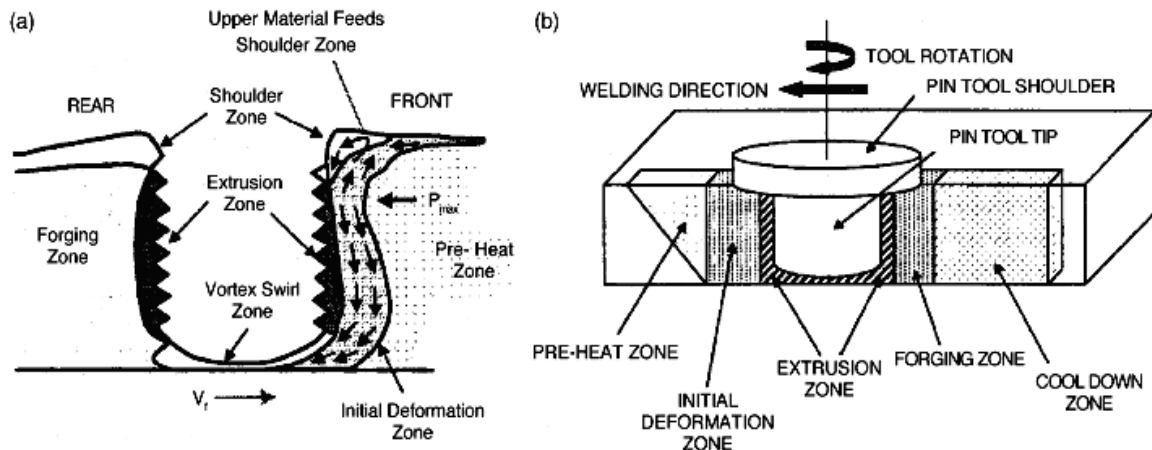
(a) Material flow patterns and (b) metallurgical processing zones developed during Friction Stir Welding [38]
